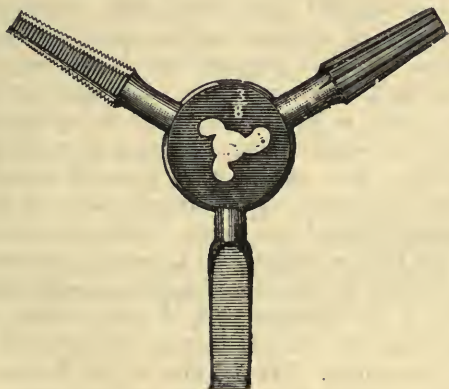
THREE-BRANCH COMBINATION GAS-BURNER TOOL.
